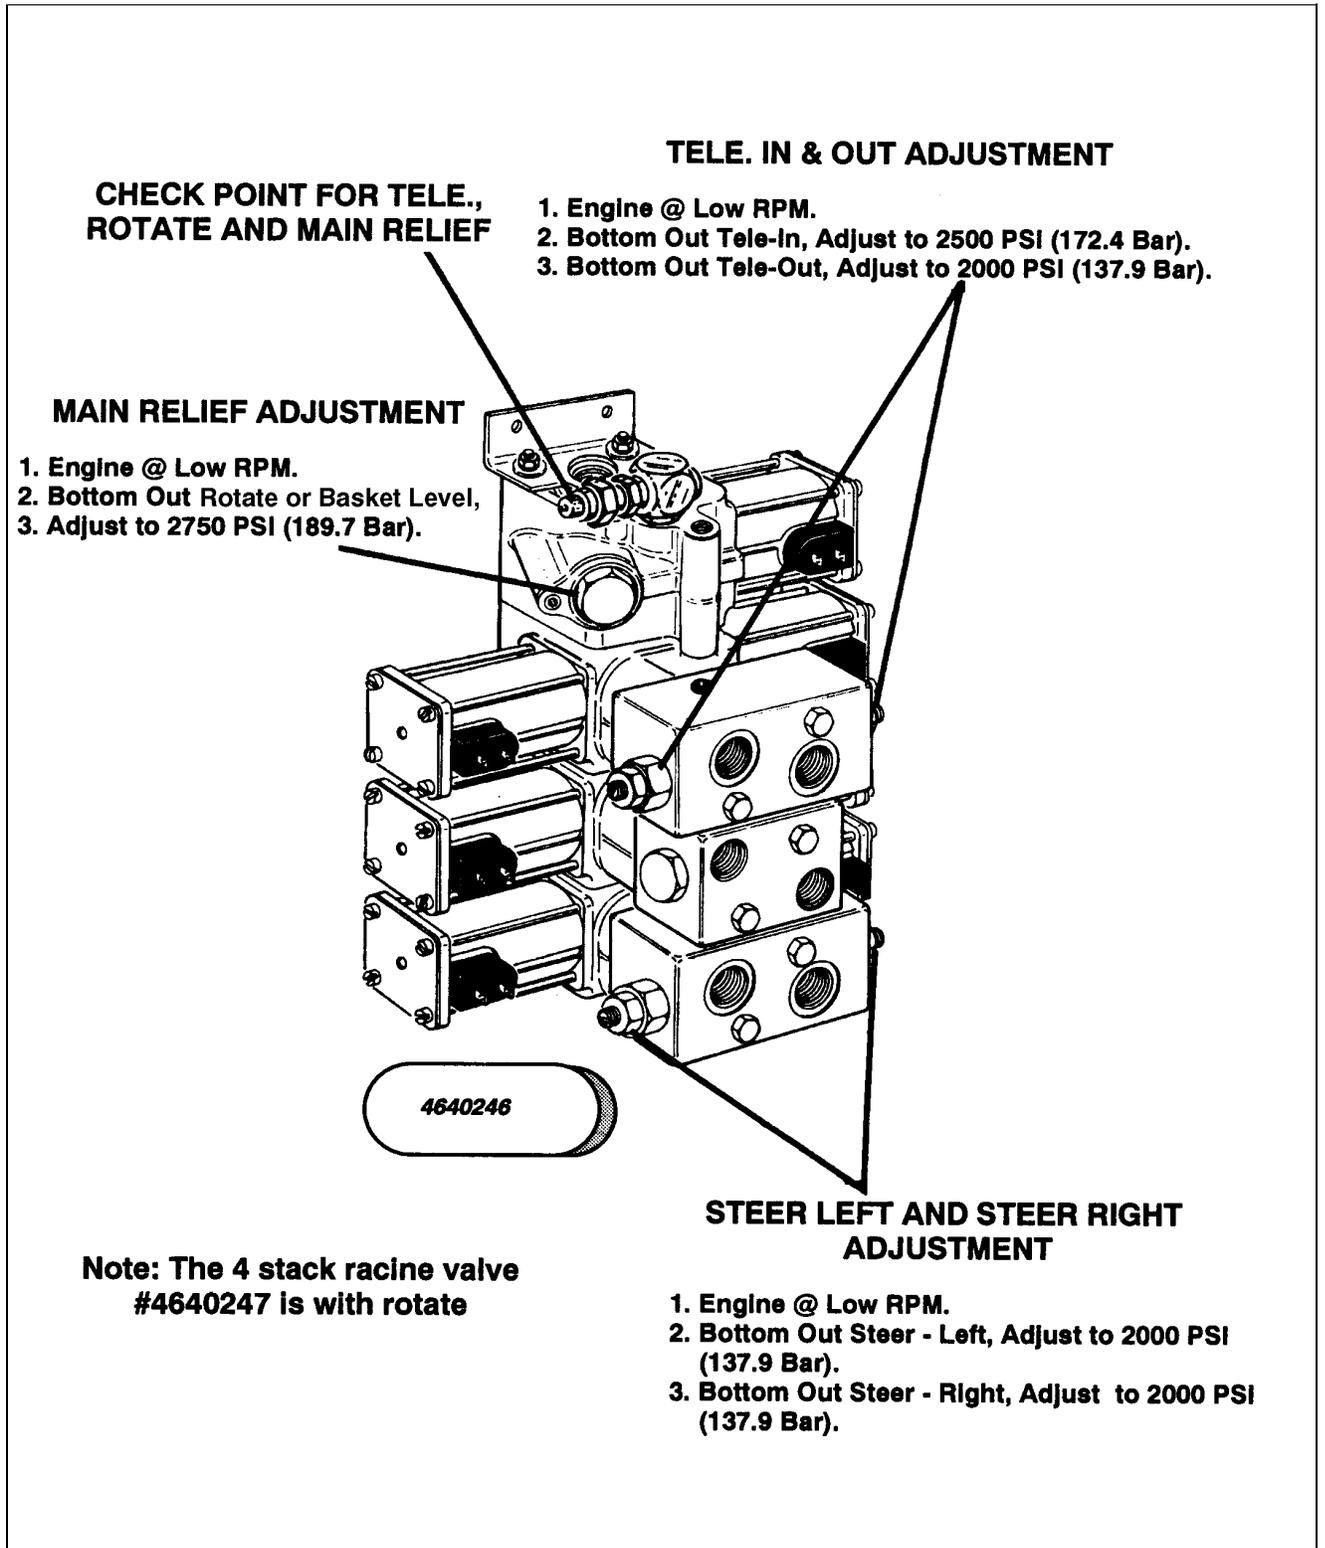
Solenoid Valve Pressure Settings, Machines Built Before 1995. (Sheet 1 of 2)
